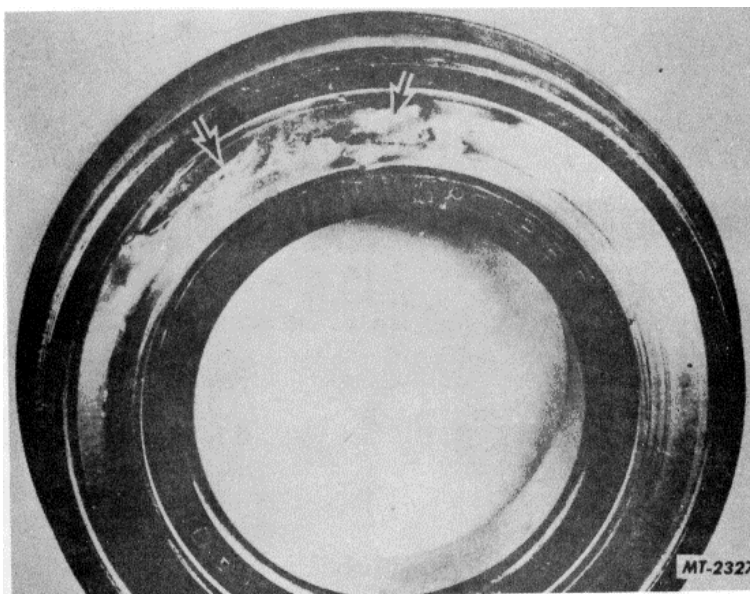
Bearing Shield Damaged From Removal With Punch.
